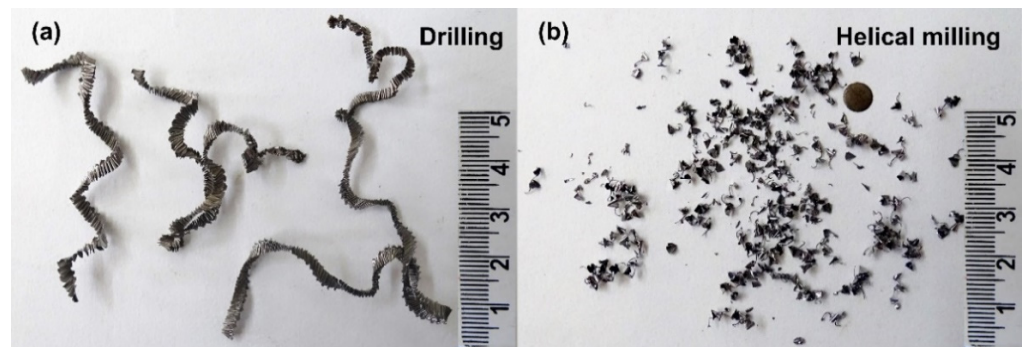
(a) Continuous chips during drilling. (b) Discontinuous chips during helical milling.
